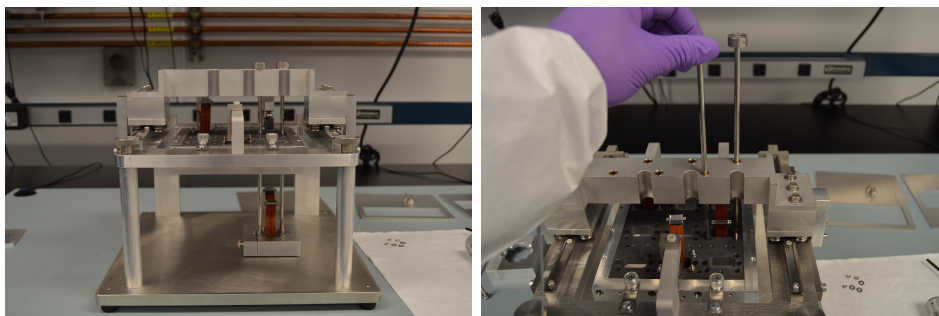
When installing sensors to assemble RSA (raft sensor assembly), sensor originally in a jig is moved to MF07 by pulling it out from jig, then it is connected to the baseplate (MF08) using MF06.
